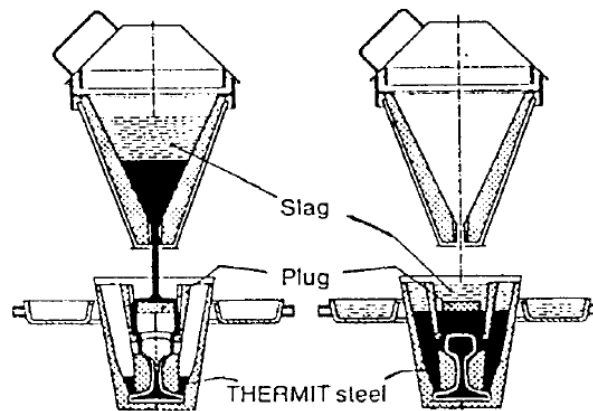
Schematic thermite welding apparatus- From the reference ³¹
